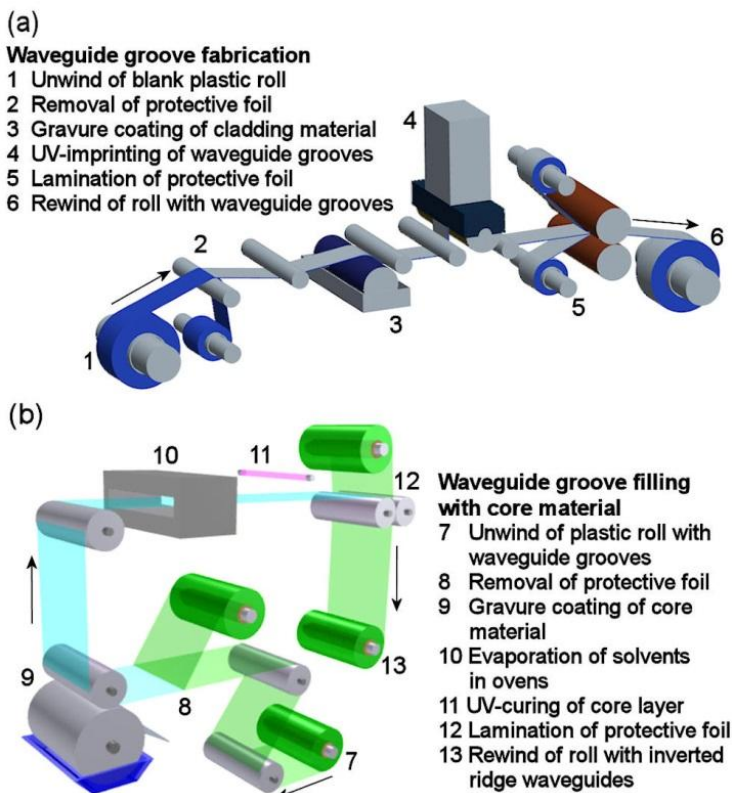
Schematic of the R2R units and the fabrication steps in a) waveguide groove manufacturing and b) waveguide groove filling. (Paper III)
